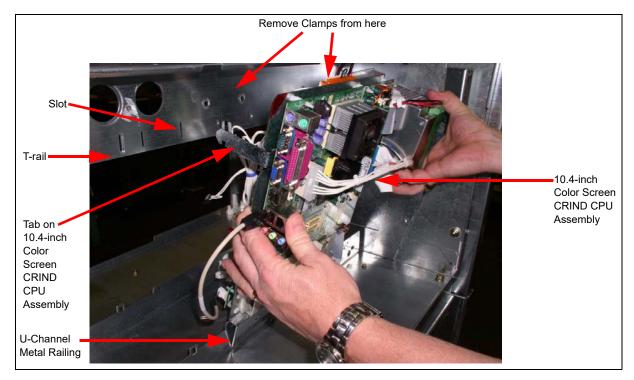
DSL Board, CPU Assembly, and Audio Boards
